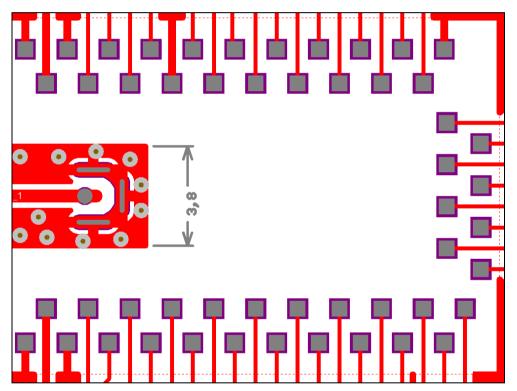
Exemplary base board footprint for 22M10 /23M10 (top view)
